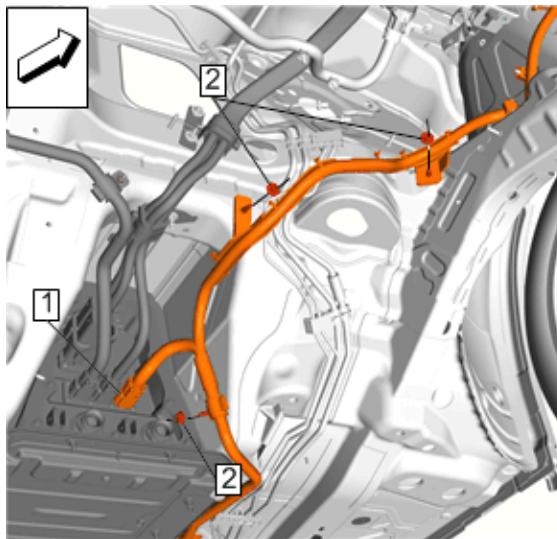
Drive Motor Battery Electrical Connector And Fasteners
